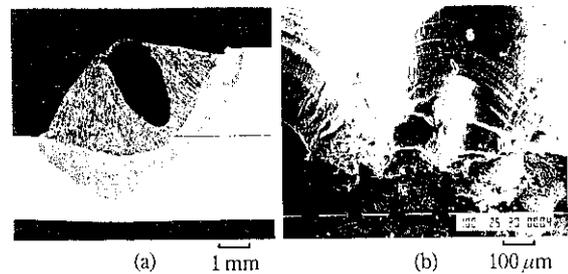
Cross sectional view (a) and inner surface (b) of typical blowhole generated in the lapped MAG welding of zinc coated sheets (45/45 g/m²)
